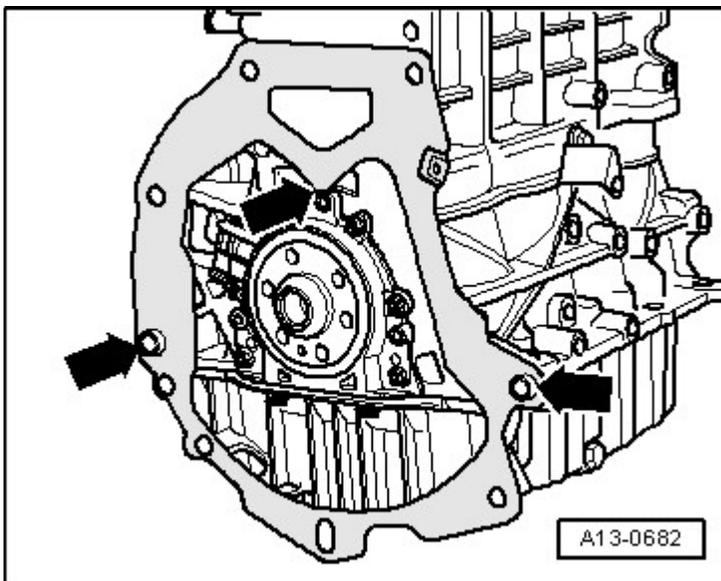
Identifying Intermediate Plate Is Hooked In At Sealing Flange And Is Pushed Onto Alignment Sleeves
